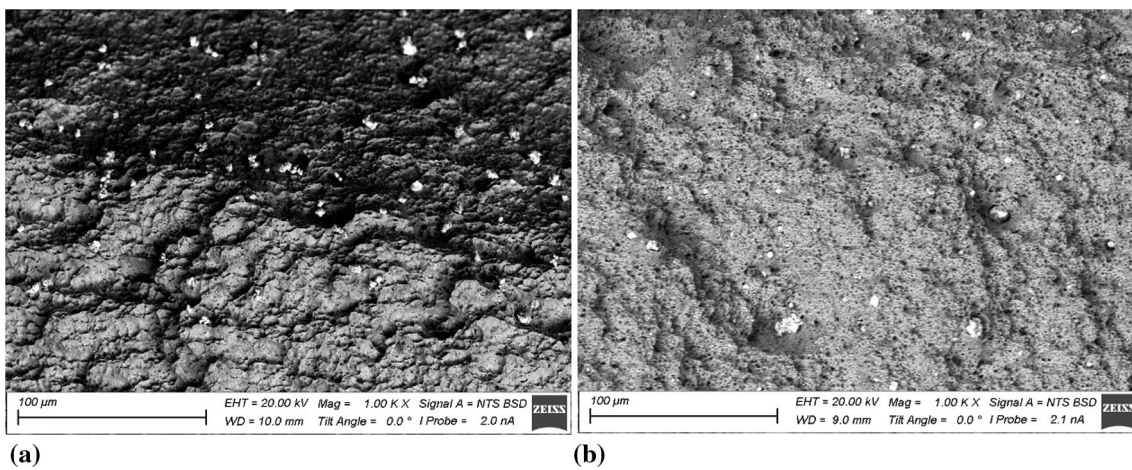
SEM BSE images of the tensile test fracture surfaces of the FSP-ed bronze/15 vol.% W after 1 pass (a) and 4 passes (b)
